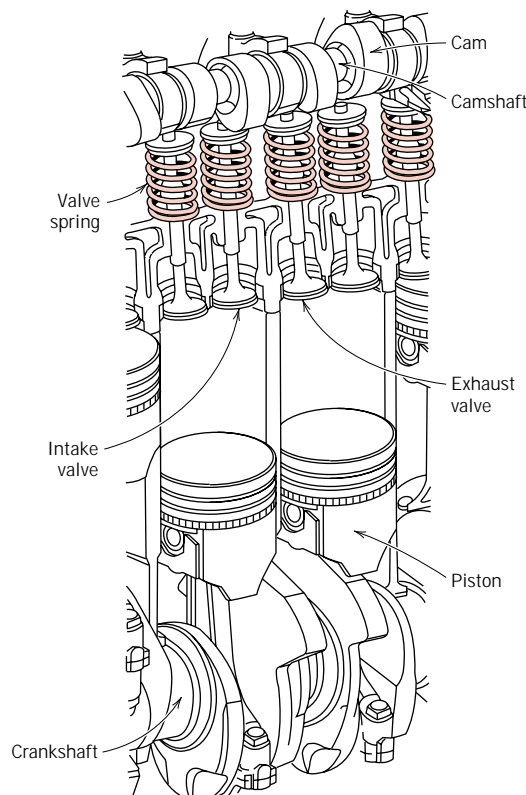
Cutaway drawing of a section of an automobile engine in which various components including valves and valve springs are shown.
